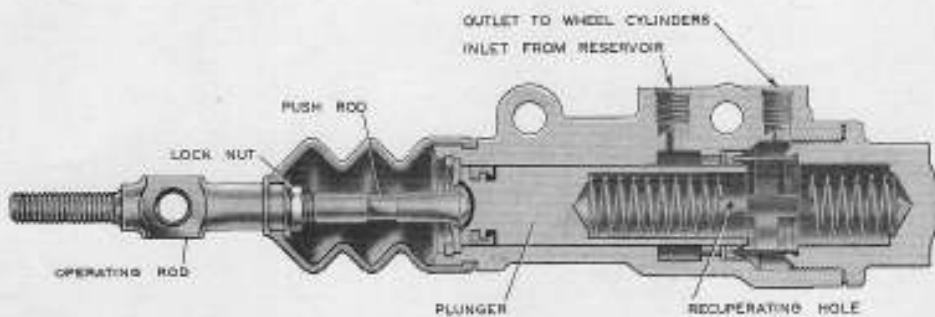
MASTER CYLINDER - SECTIONAL VIEW
